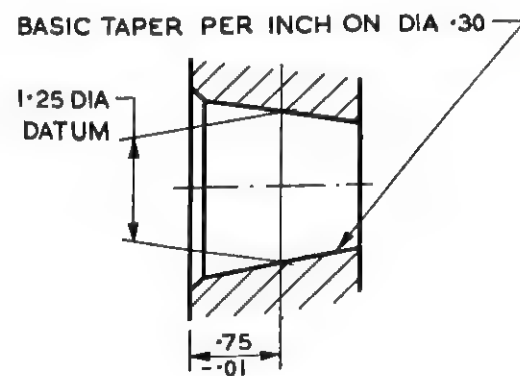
Basic taper (or angle) method of tolerancing a fast taper
